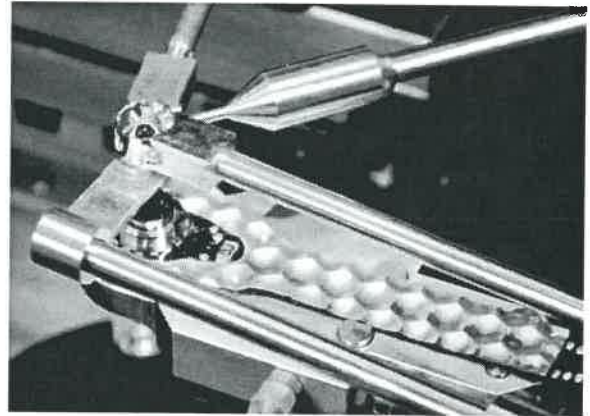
A view of the operating arena of the FlexFAM. The lower target half subassembly lies below the tooling used to manipulate the capsule fill-tube assembly and diagnostic band.
